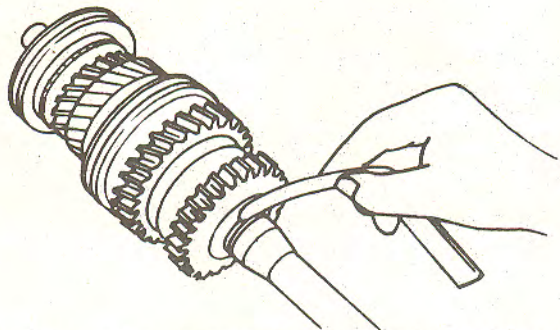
Check the clearance at the position shown to fit a circlip of the correct thickness.
